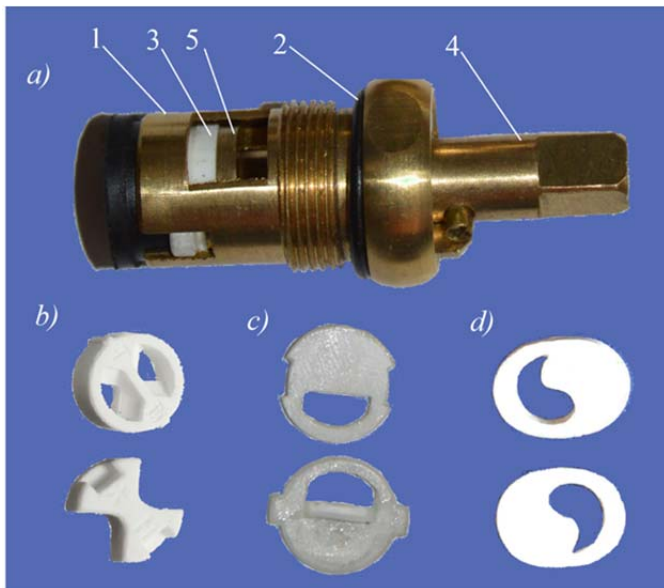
Appearance of the disc pairs with a different shape of through hole a) tap valve; 1 - casing; 2 - casing seal; 3 - disc pair; 4 - stem knob; 5 - stem; b) sectors; c) segment; d) "curved drop".
